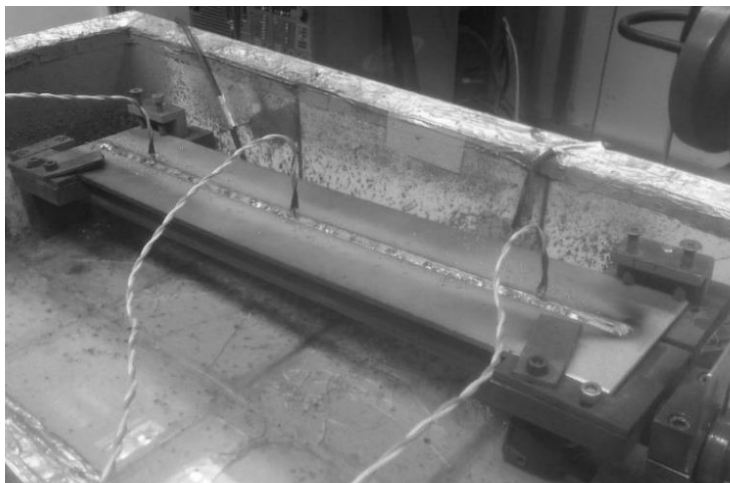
Positioning of the thermocouples in the weld seam
